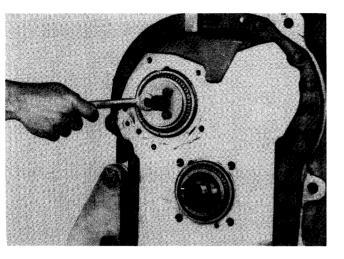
Remove idler shaft rear bearing retainer nut and spacer.
